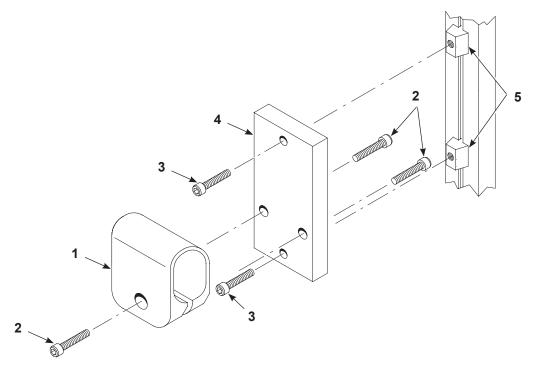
Extrusion Spray Gun Mount Assembly for Tube-Mount Spray Guns
